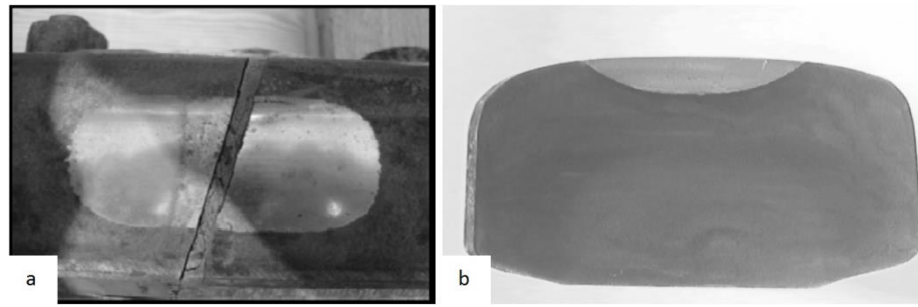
Martensitic stainless steel IRJ, (a) top view of ex-service IRJ fabricated with a 15-degree angle cut, (b) section showing bathtub shape of metal deposit.
